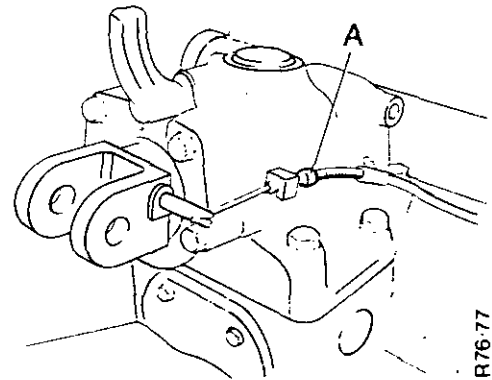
REMOVAL OF THE SELECTIVE SENSING UNIT
